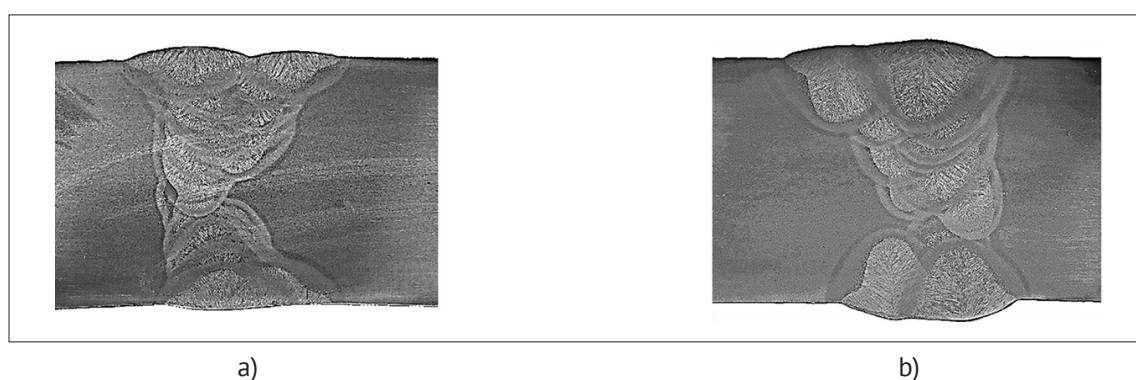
Macro-structure of welded joints of steel of category E36: a) $HI=2.5$ kJ/mm; b) $HI=4.2$ kJ/mm (x1.5)
